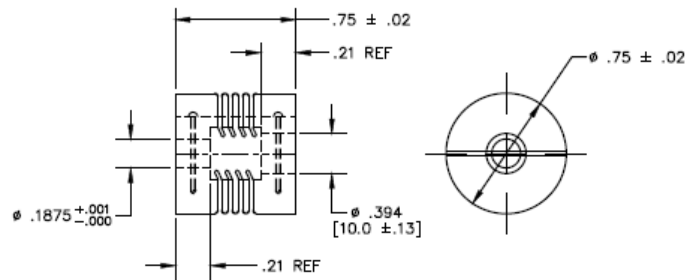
Coupling Adapter (Dimensions in inch [mm])
